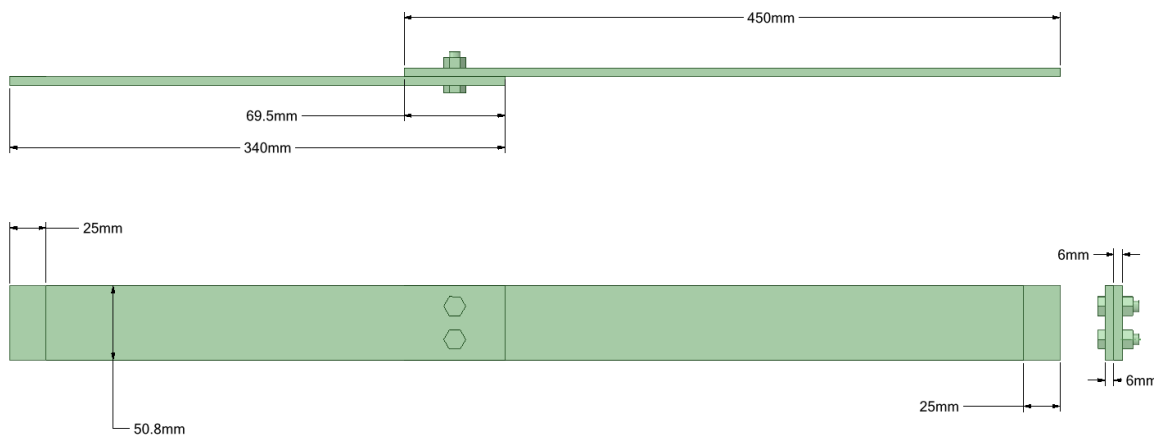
Geometric Setup for Bolted joint with 69.5mm
